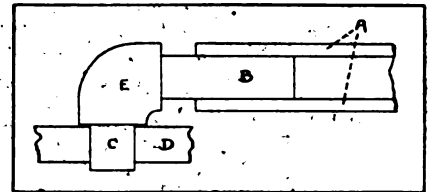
SECTIONAL VIEW OF STUD IN ONE PIECE. A—TUBE END.—B. HORIZONTAL END OF STUD.—C.—VERTICAL END OF STUD. D.—TABLE. E.—ELBOW.
